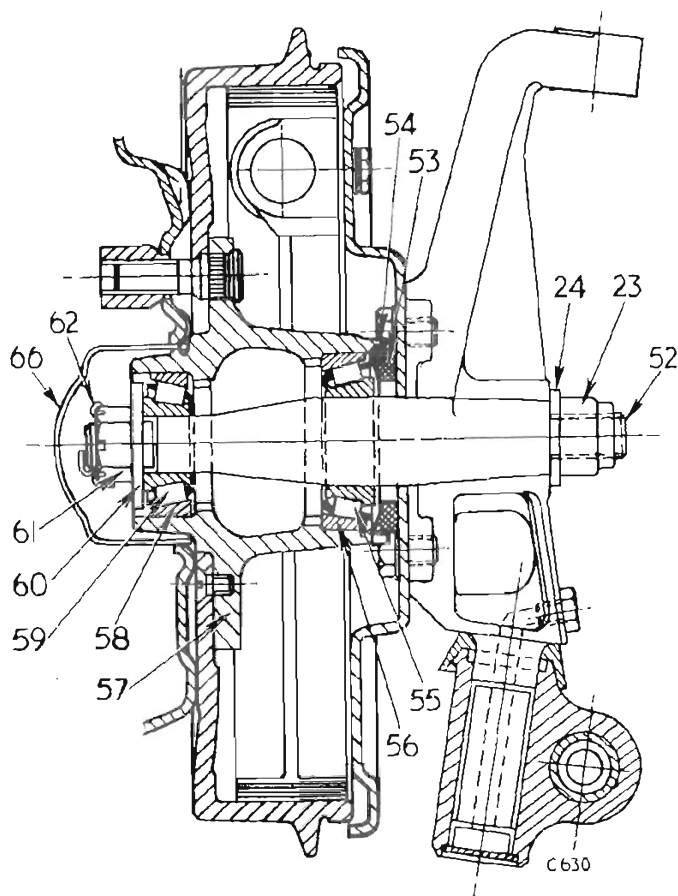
Cross section of Herald 1200 drum brake and hub assembly
